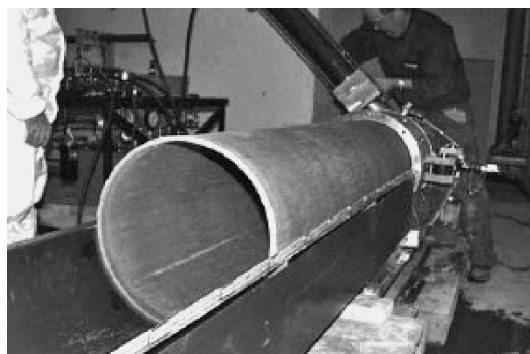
Extruded ECC mix for piping elements (Li, 2008)
